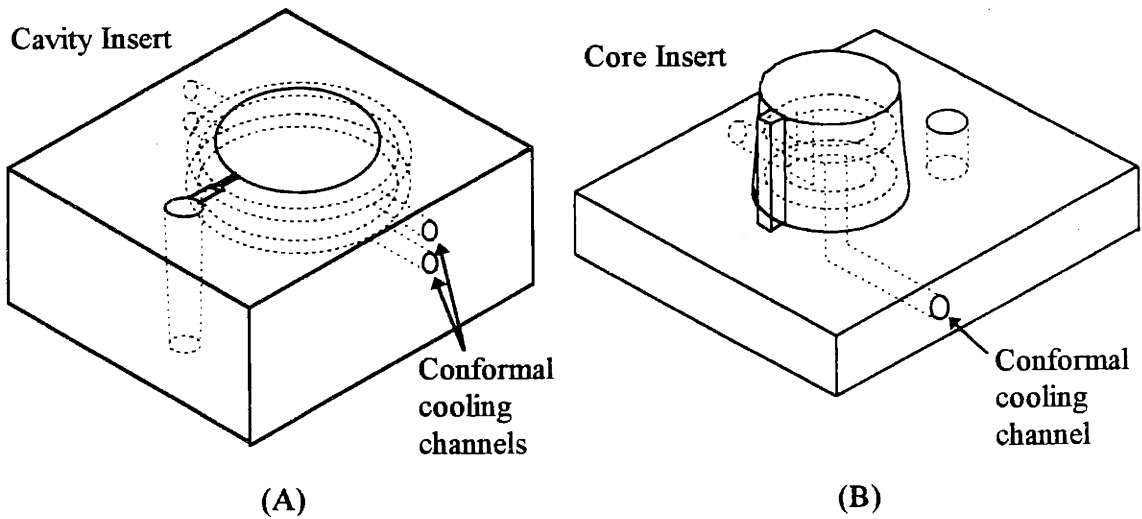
Cooling channel placement in the 3D Printed cavity (A) and core (B) inserts.
